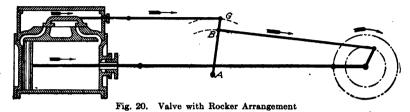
shows a valve that is not in line with the eccentric. An instance where this occurs is in horizontal engines when the valve is set on top of the cylinder instead of on one side. By means of the rocker AG, the valve may receive its proper motion.
